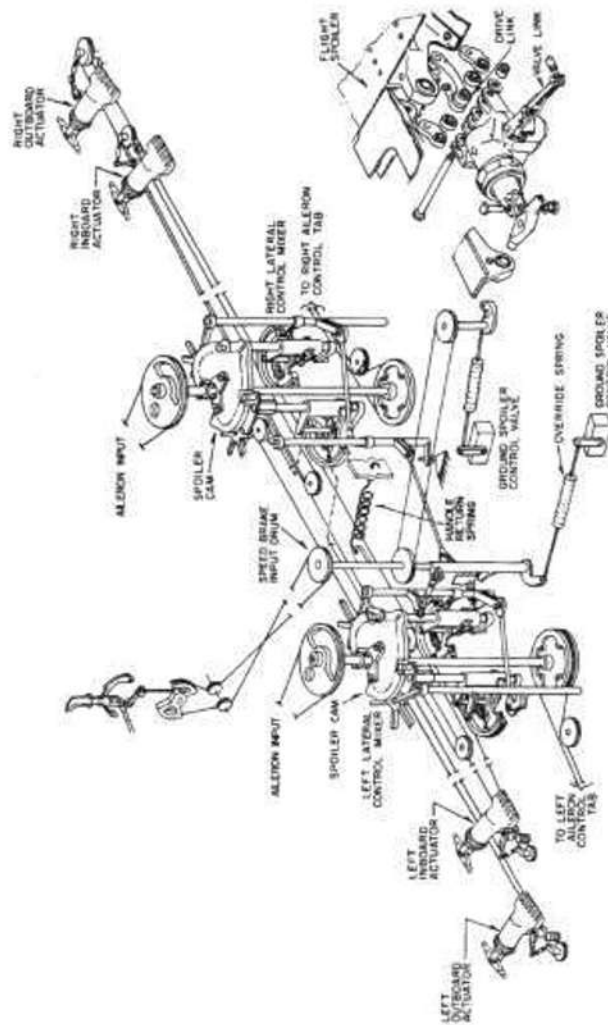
Cable Controlled Spoiler System (MD80) Torque Limiting
